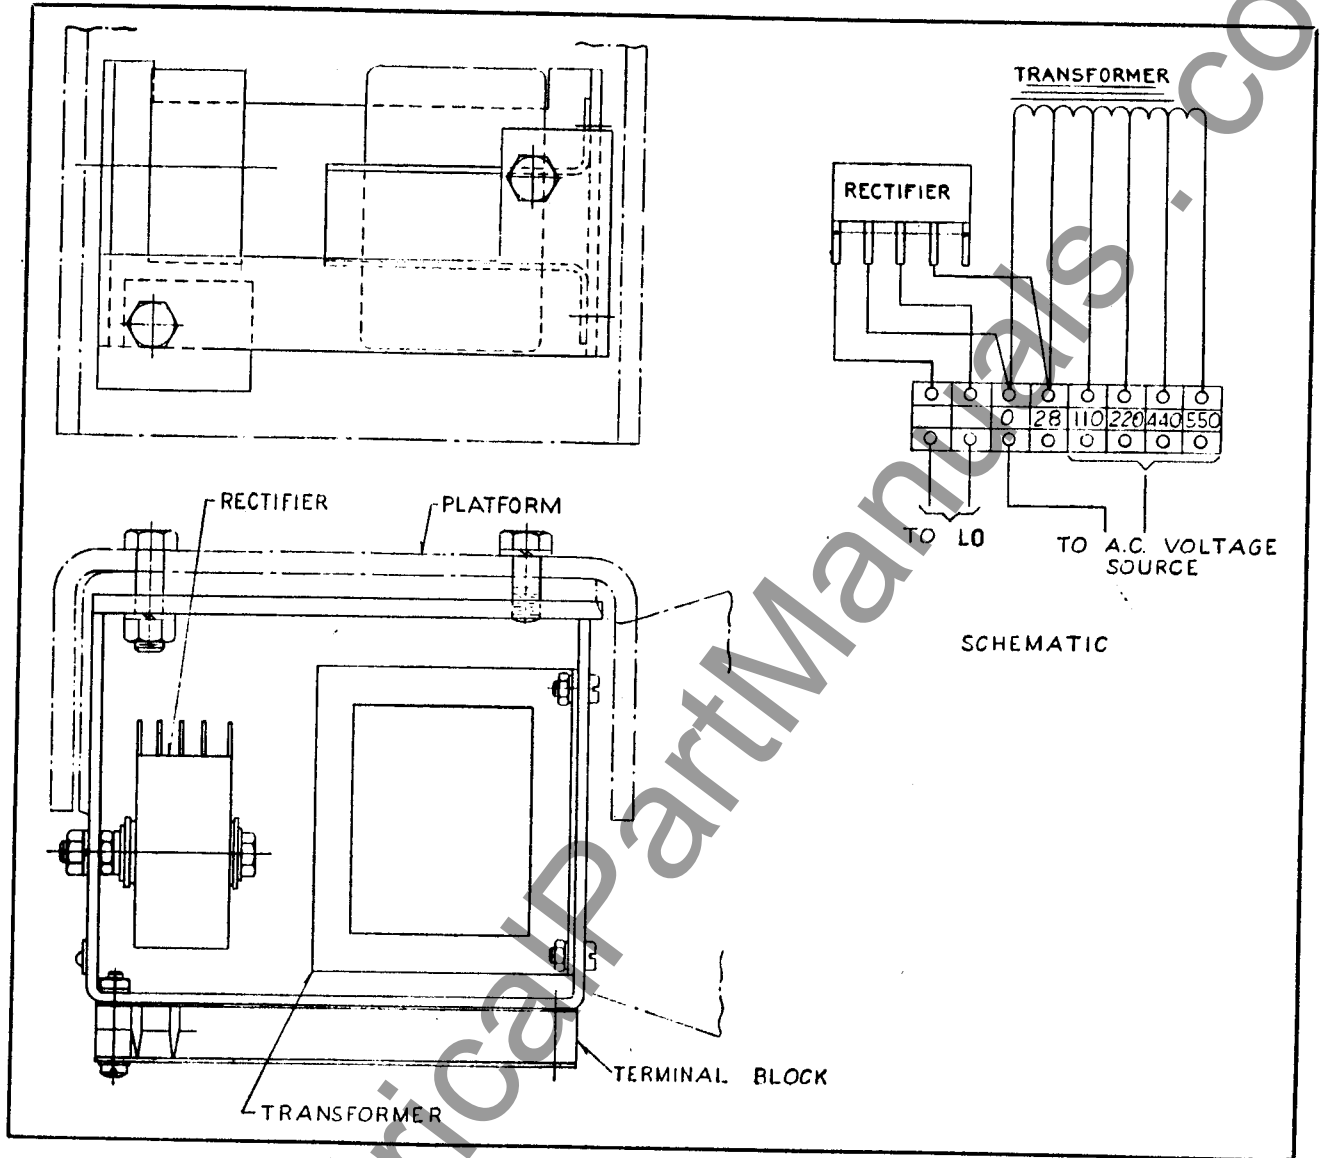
Rectifier Unit for A-C Electrical Lockout Attachments
